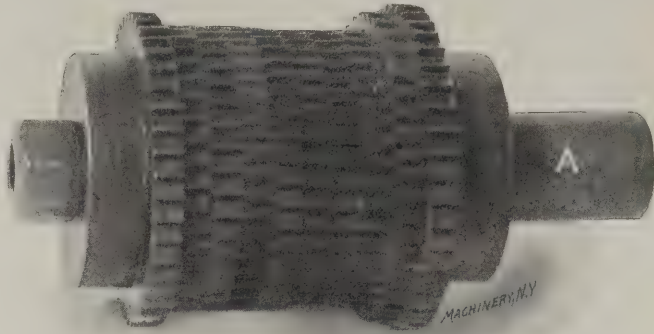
Thin Milling Cutters Mounted on Arbor for Hardening.
